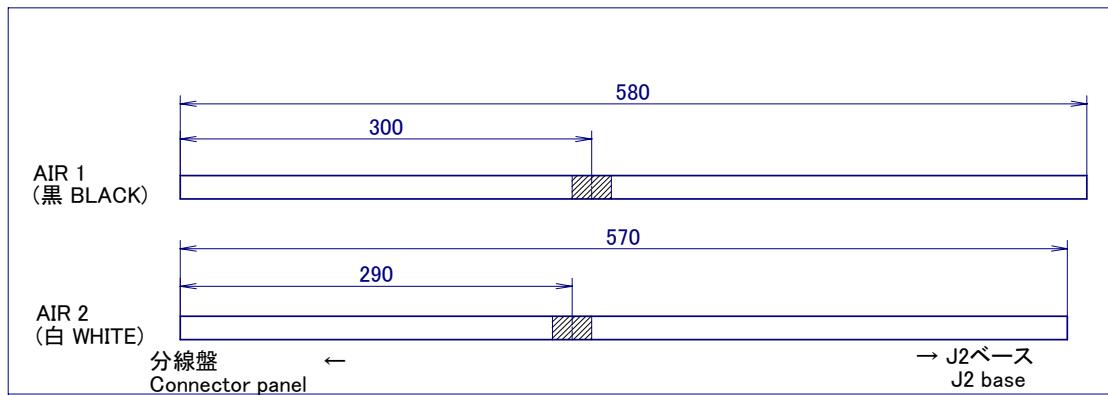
(a) Marking of air tube (connector plate to J2 base)( LR Mate 200iC, LR Mate 200iC/5L,5WP,5H)
